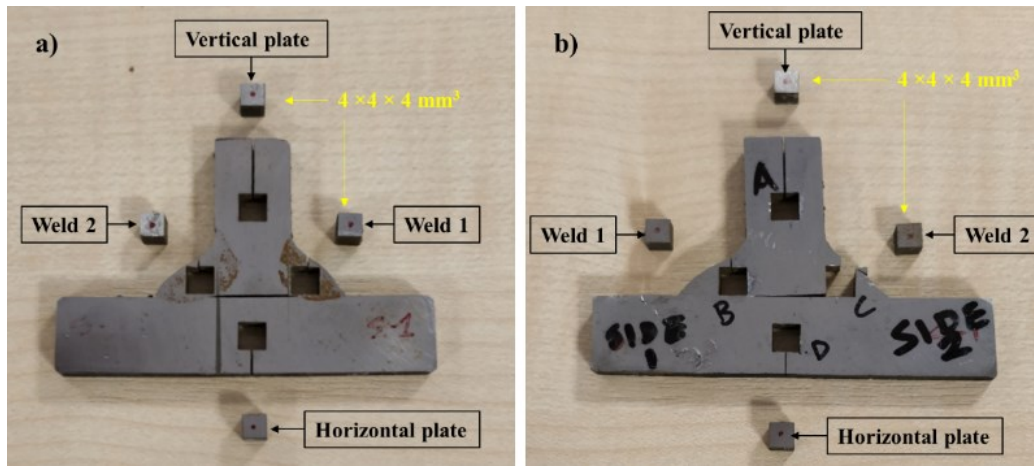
Reference stress-free samples from fillet welded plates: a) Stress-free cubes from fillet welded plate with the long weld, and b) stress-free cubes from fillet welded plate with the short weld.
